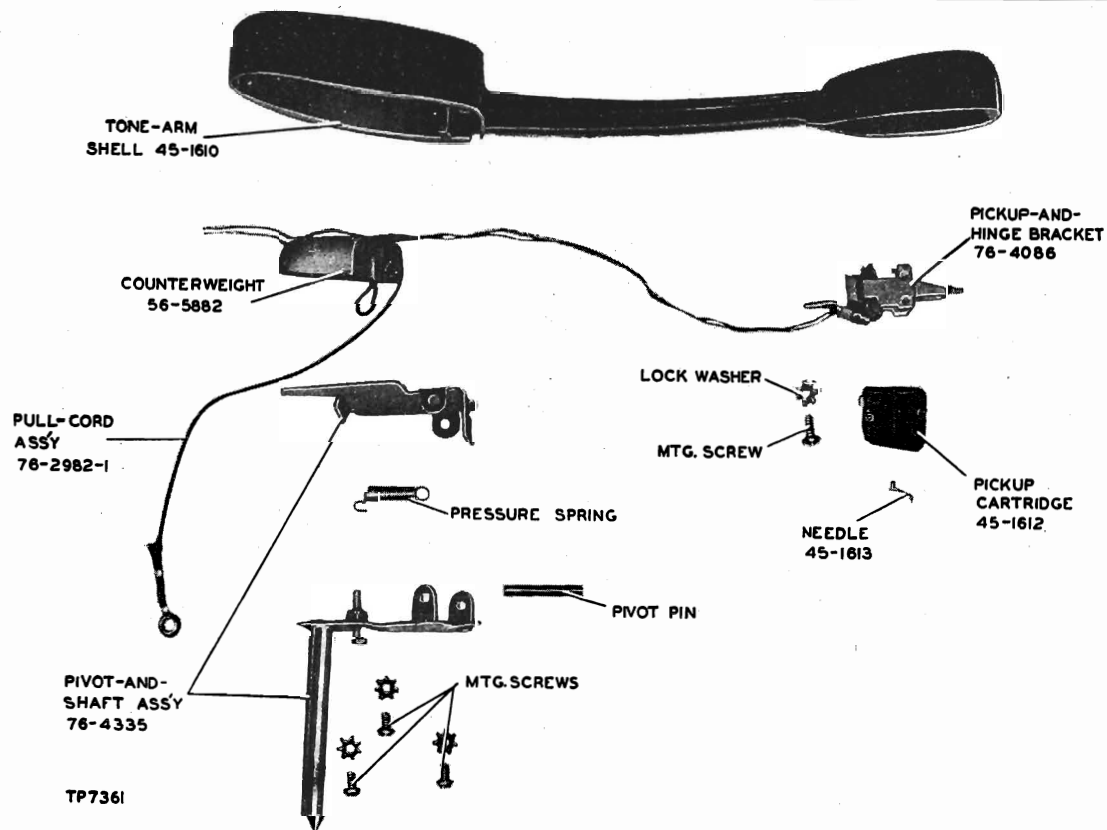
LONG-PLAY TONE-ARM ASSEMBLY (35-2686)
